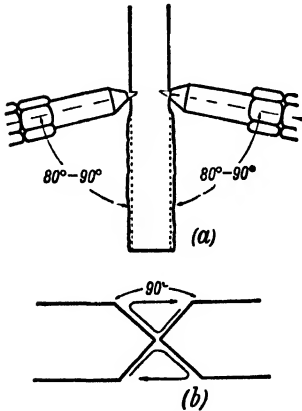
(a) Two-operator vertical bronze welding of cast iron. (b) Showing motion of pipe and rod
